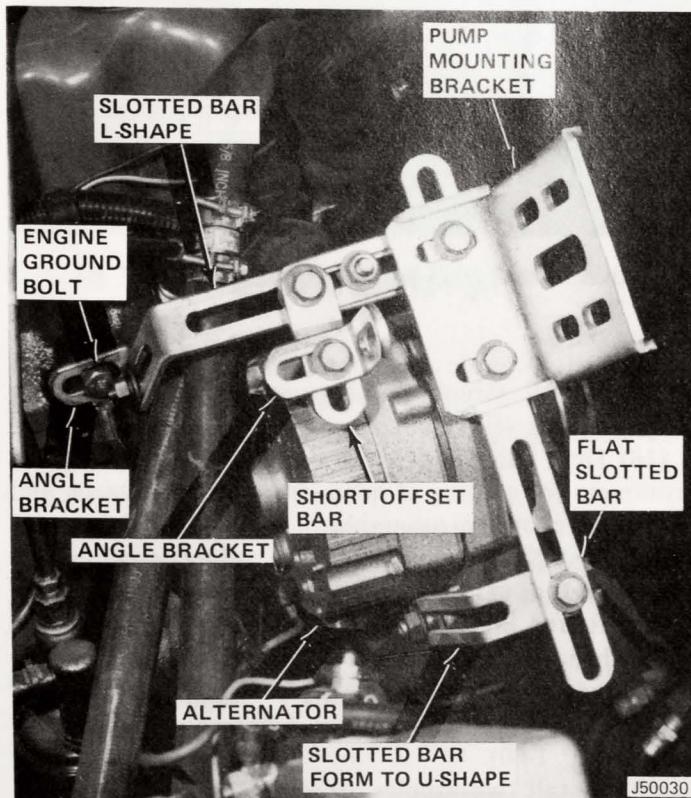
Pump Bracket Installation—Six-Cylinder
